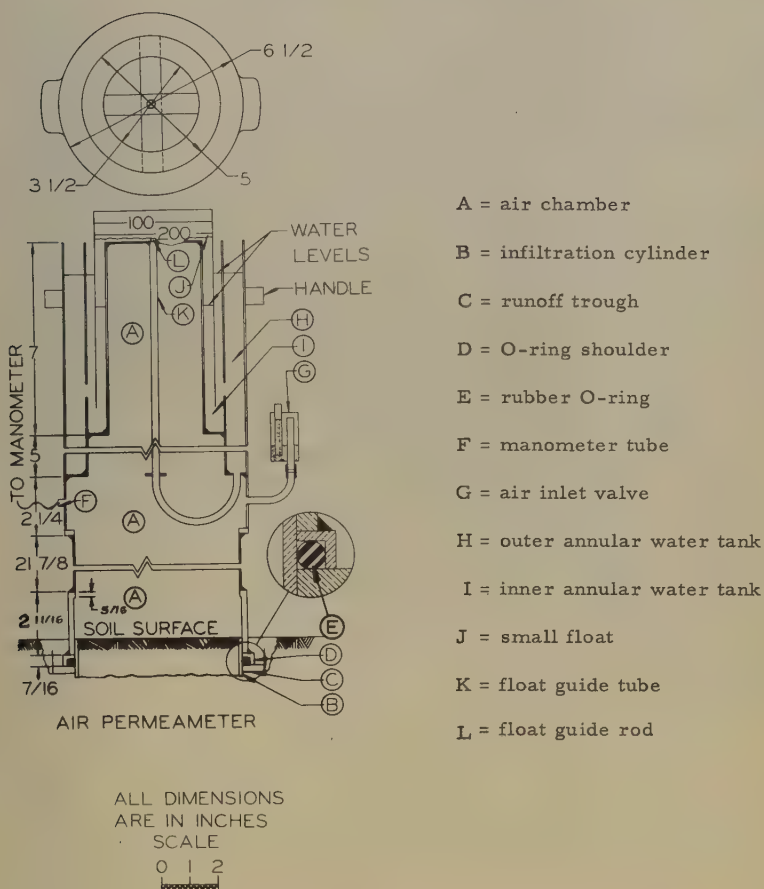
Assembly drawing of air permeameter showing constructional details; jagged lines across the drawing indicate omission of sections of vertical tubing.
